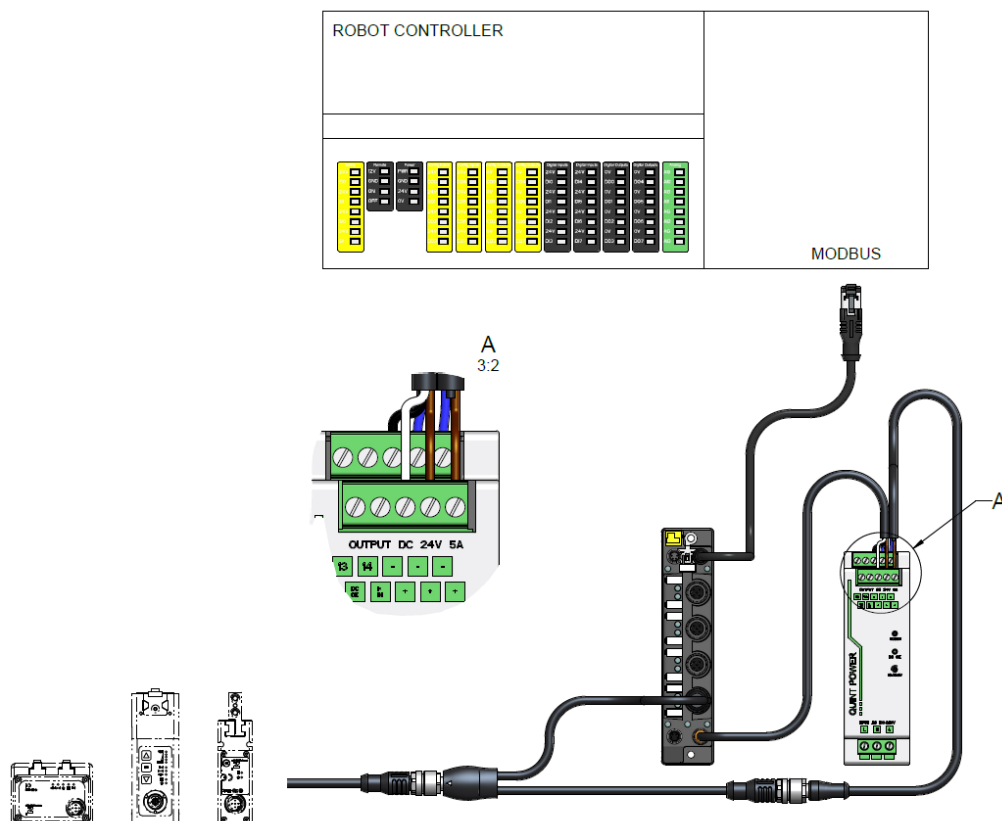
An example for the wiring between robot and the Zimmer Easy-To-Use-Package
